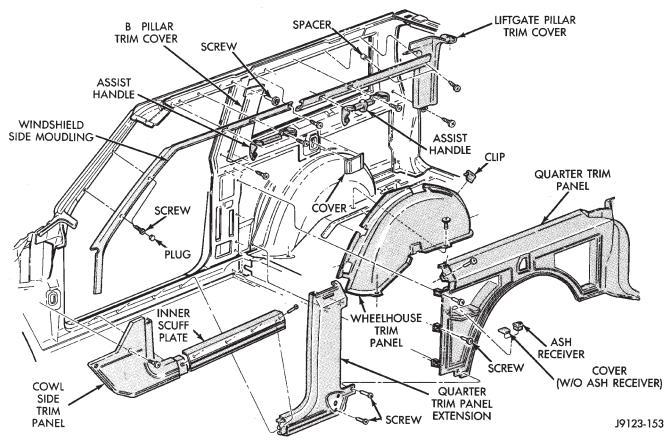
Interior Trim Panels/Mouldings/Scuff Plate—XJ 2-Door Vehicles
